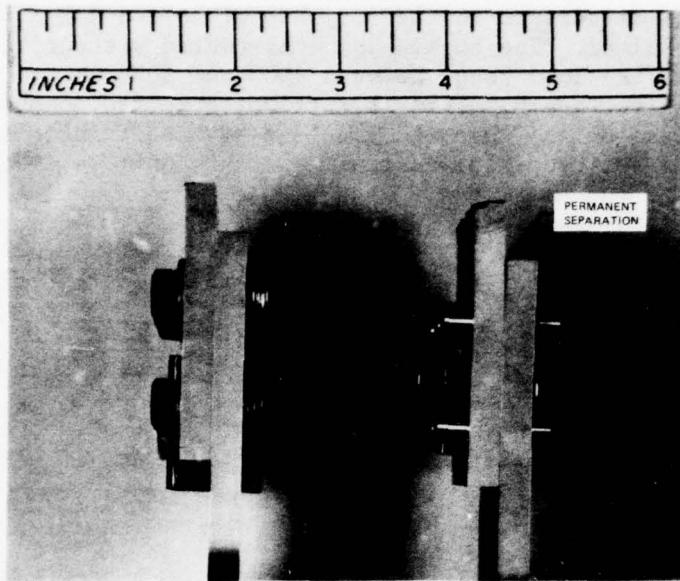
Side view comparing bending of the pinned- and bolted-type attachments for the joint-circumferential splice specimen.
